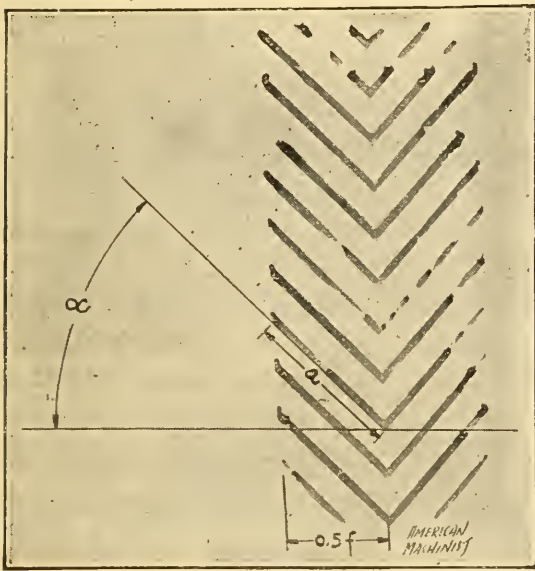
IMPRESSION MADE BY ROLLING SAMPLE HERRINGBONE GEAR.
